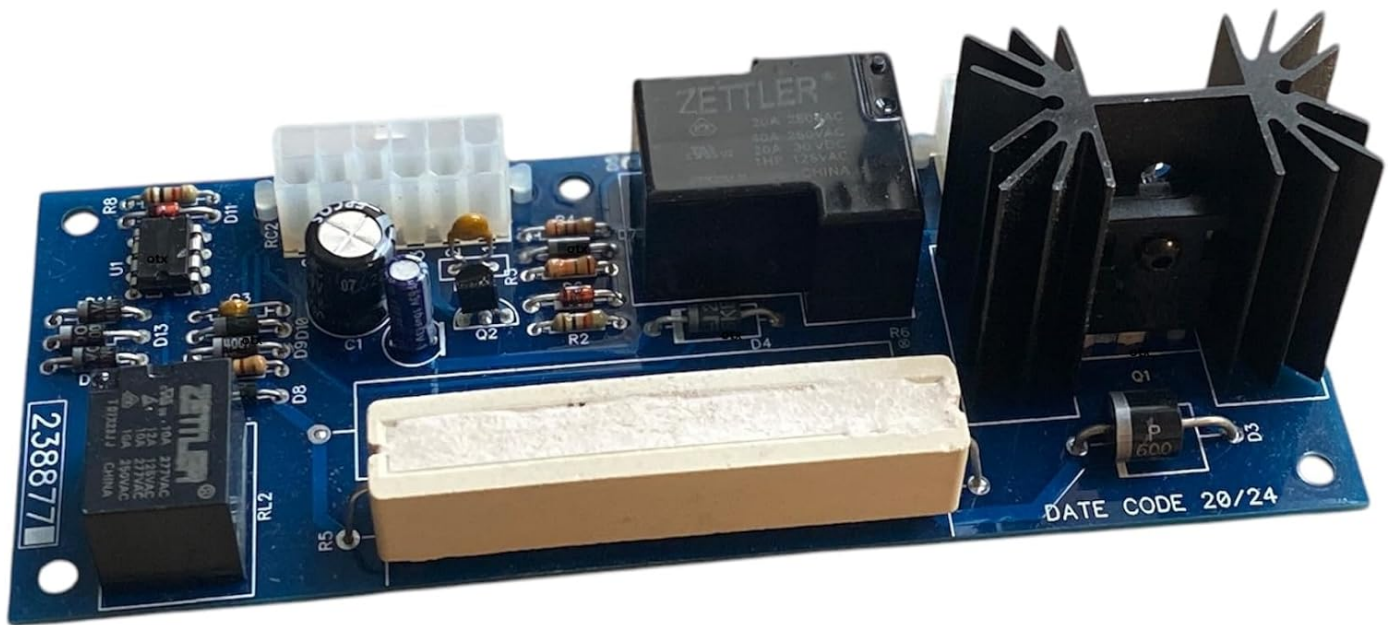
Angled view of the control board, illustrating the arrangement of key components such as heat sinks and relays, which are crucial for motor control.
